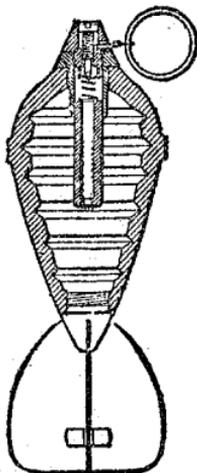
Projectile of 69 millimeters (about 2.75 inches), type B, 1916.
